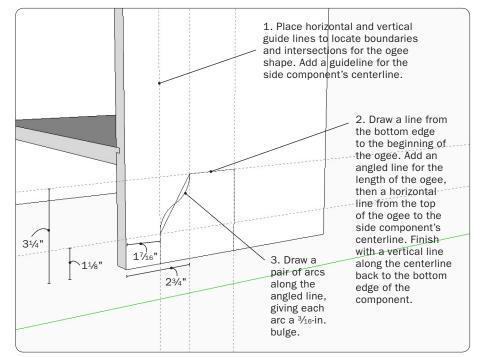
You need to draw only one ogee-shaped cutout. You copy and flip it to add the rest to the model.
